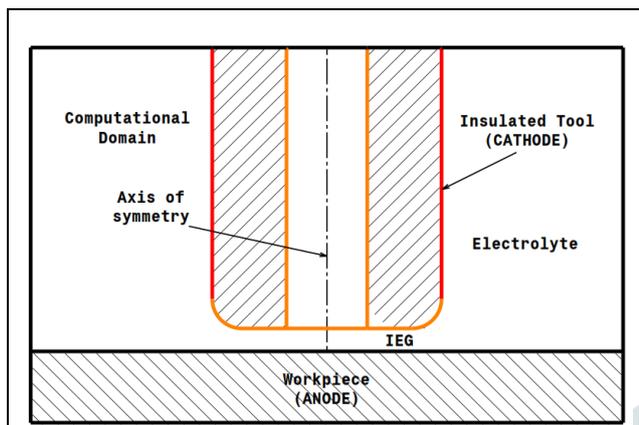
Problem Definition- Two dimensional Computational Domain –Tool, Workpiece and Electrolyte.
